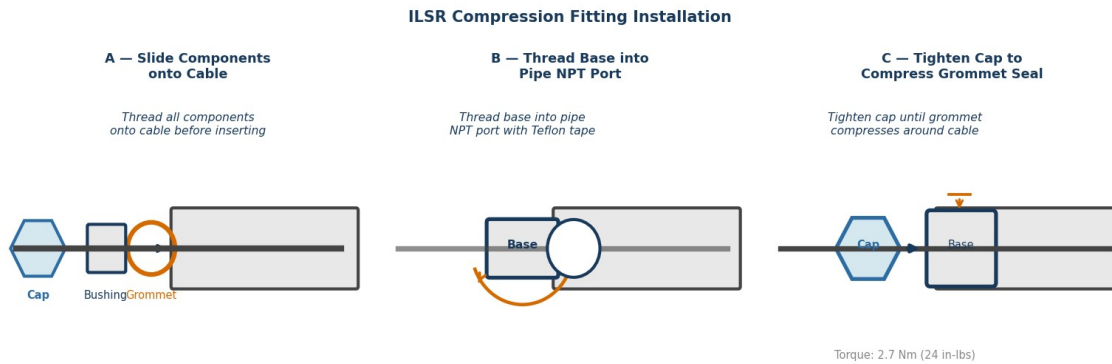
Fitting installation: (A) thread components onto cable, (B) thread base into NPT port, (C) tighten cap to seal
